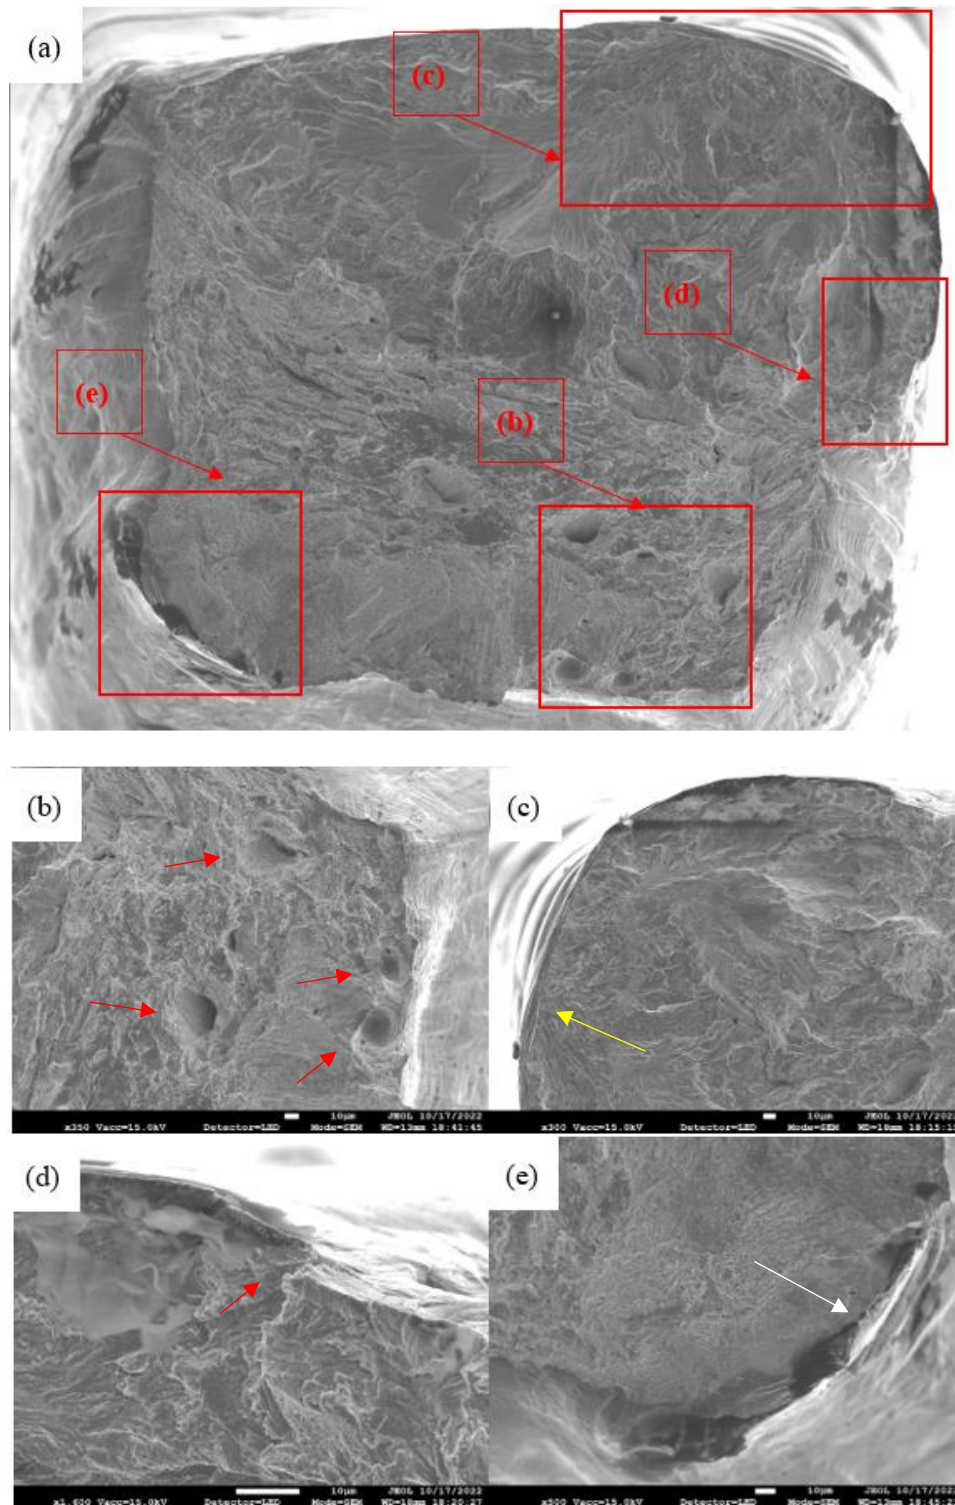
Fracture surface of B3 micro tensile specimen, which failed under cyclic loading with  $\sigma_{Max} = 484 \text{ MPa}$  at  $R=0.1$ ;  $N_f=148k$  cycle (a) macroscopic view (b) pore on the final failure region highlighted with red arrow (c) crack initiation point highlighted with yellow arrow (d) ratchet mark indicating coalescence (e) shear lips on the final failure region is marked with white arrow.
